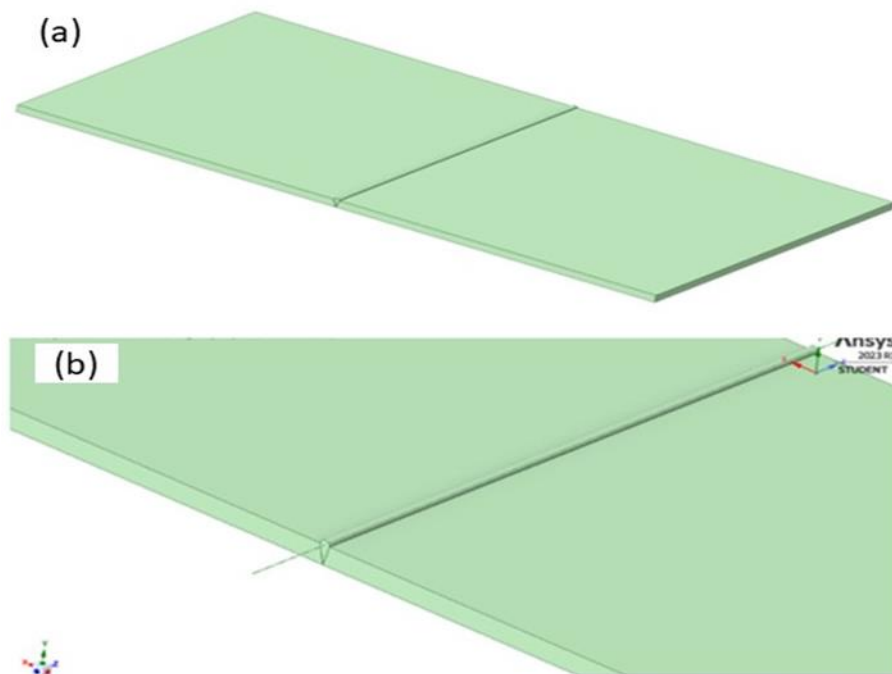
(a) The dimensions of the initial model are 60mm x 60mm x 2mm (b) Displays the side view of the welded region.
